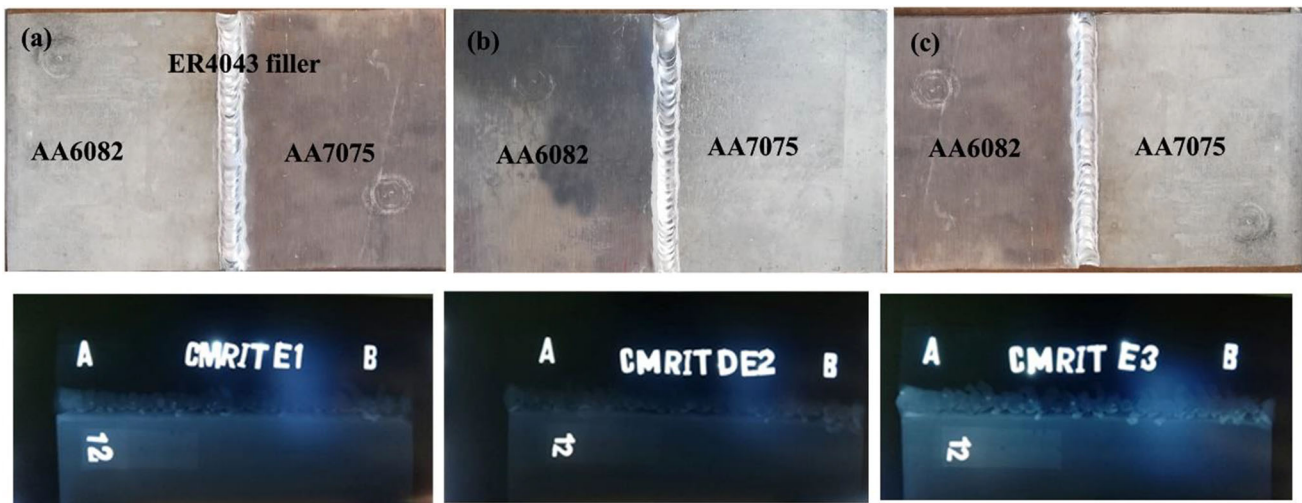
Developed dissimilar welds of AA6082 and AA7075
